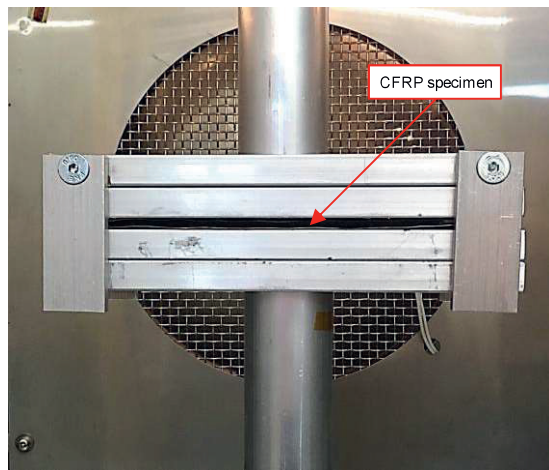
Curing setup - mechanical press inside air circulated furnace.
